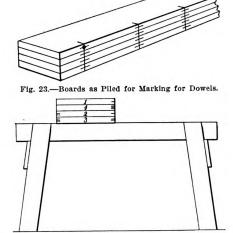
End View of Boards Arranged on Trestles Ready for Gluing.
